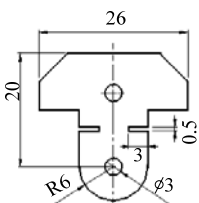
Sheet metal part Fig. 2 Dedicated punch design
